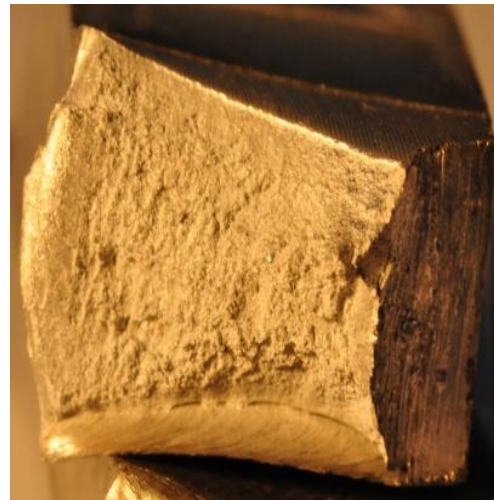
₂. Macrophoto. fracture (700rpm,75mm/min)
